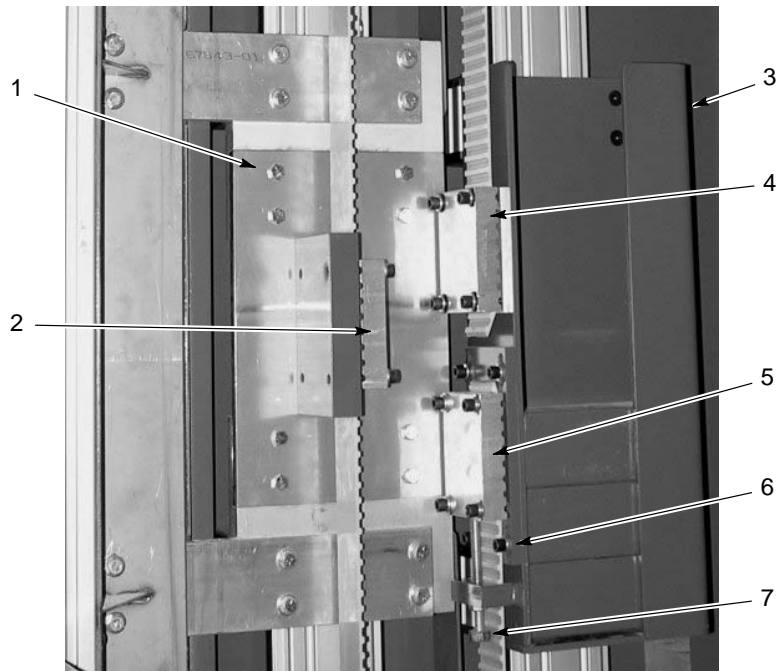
Belt Replacement - Clamp and Tension Bolt Locations.
